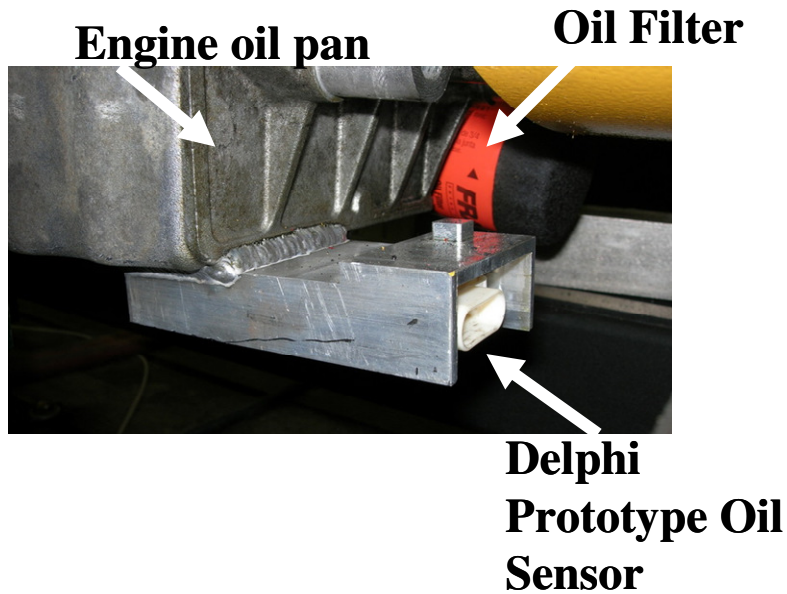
Delphi Oil Sensor mounting to the engine oil pan.
